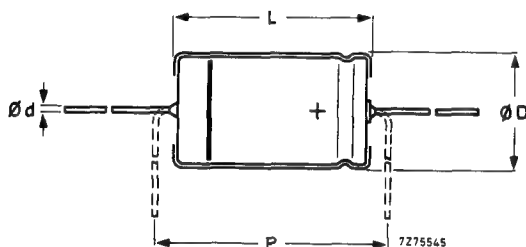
Style 1; see Table 1a for dimensions d, D, L and P.
